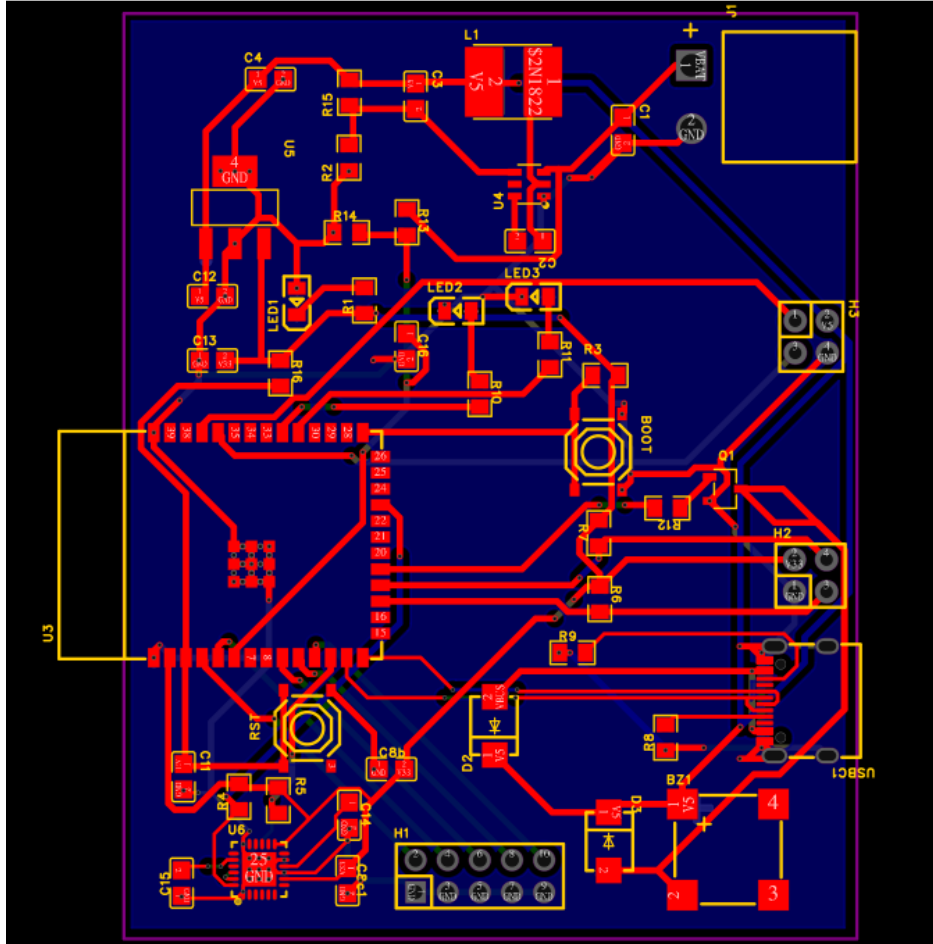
Custom ESP32-S3 carrier PCB layout showing component placement and copper routing.
